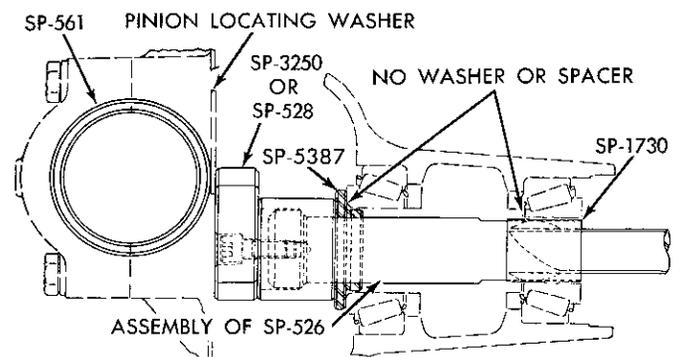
Tool C-758-D4 Installed in Housing (8-3/4 Large Stem Pinion)
